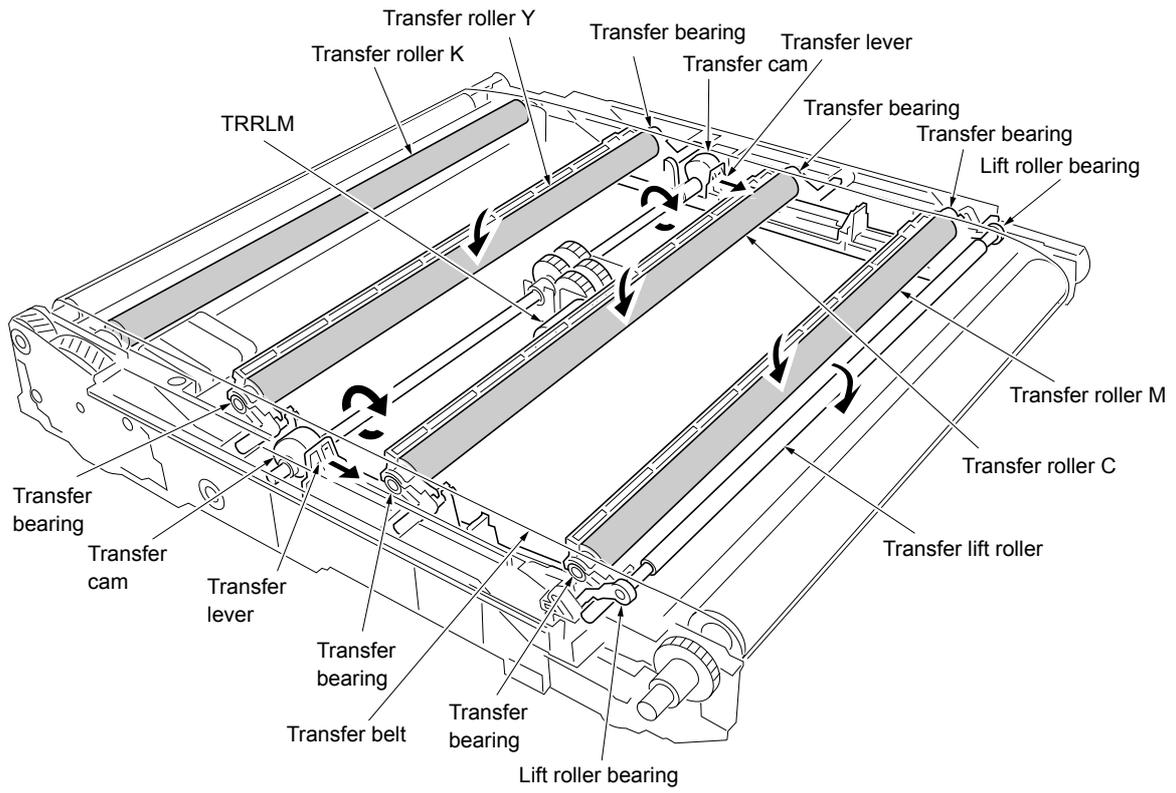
Transfer rollers Y, C, M lifter mechanism
